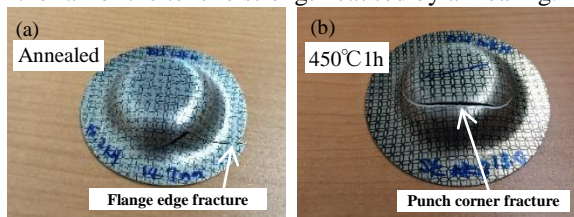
External view of fracture locations caused by cylindrical deep drawing test
